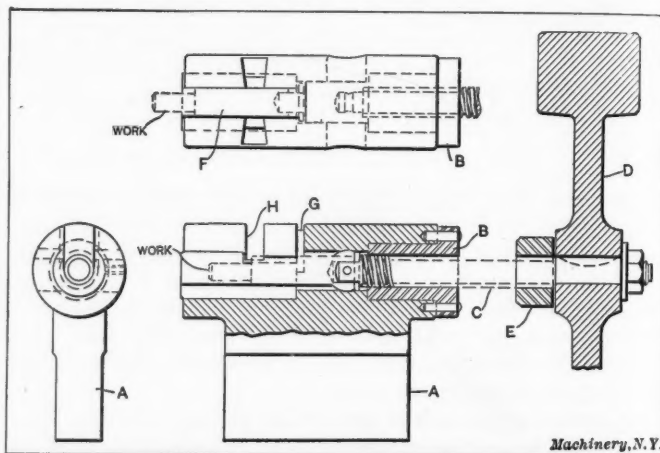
Milling Fixture for Cutting Worm shown in Fig. 2
